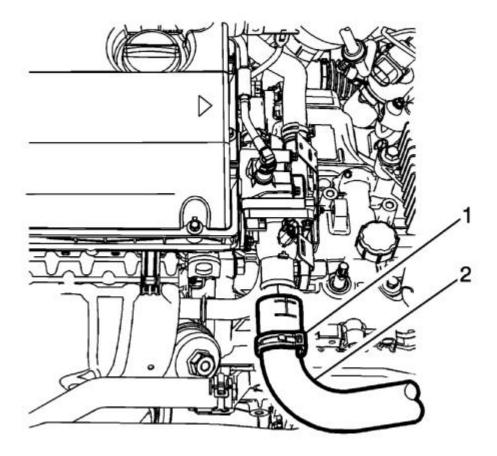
Radiator Air Inlet Hose & Clamp Courtesy of GENERAL MOTORS COMPANY
